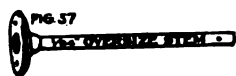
Oversize valve stems are necessary when worn valve guides are reamed out. The standard oversize valve stem is 1/4 inch.
